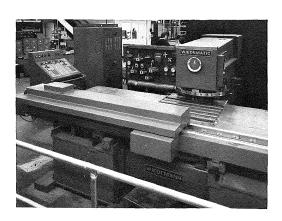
Eight-Spindle Numerical Controlled Drilling Machine
